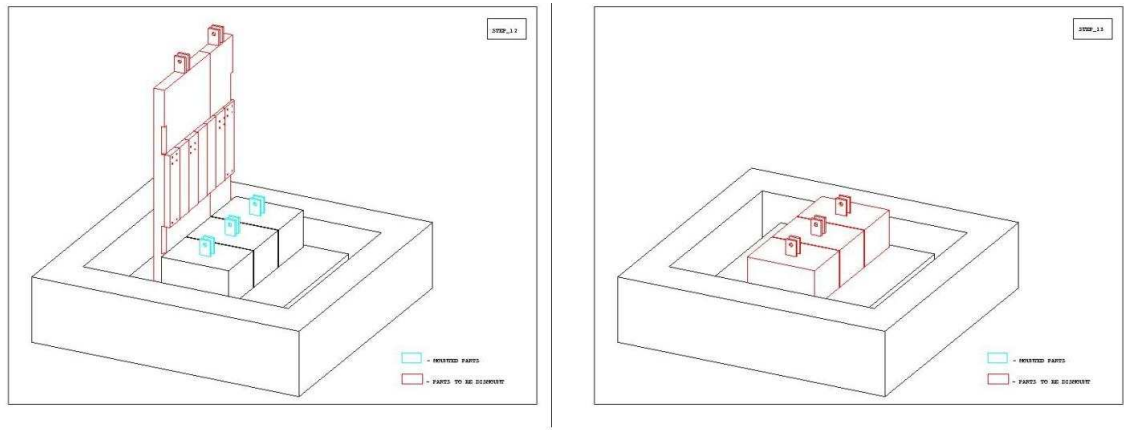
SM3 Analysis Magnet disassembly steps 13 (left) and 14 (right)
